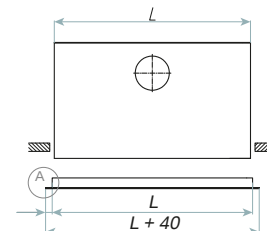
Dimensions of the boxes for inline mounting - Single installation.
